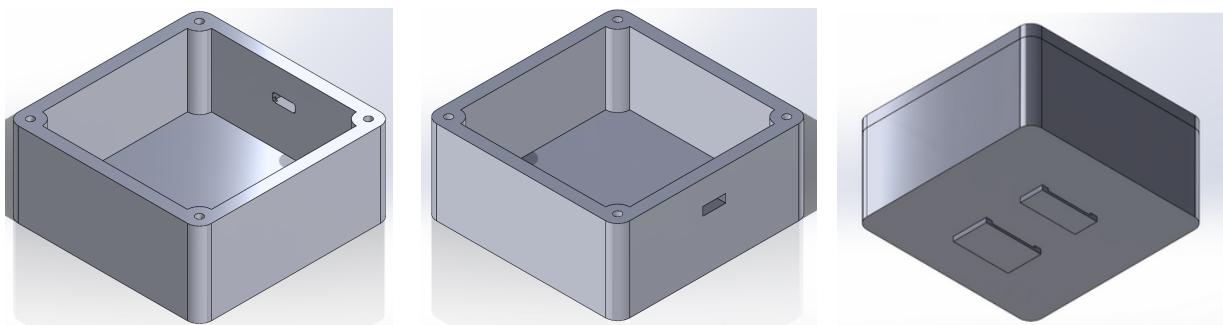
a) Front view of the housing with the port for USB-C b) Back view of resized housing with a port for USB-C c) Bottom view of resized housing with a port for USB-C
